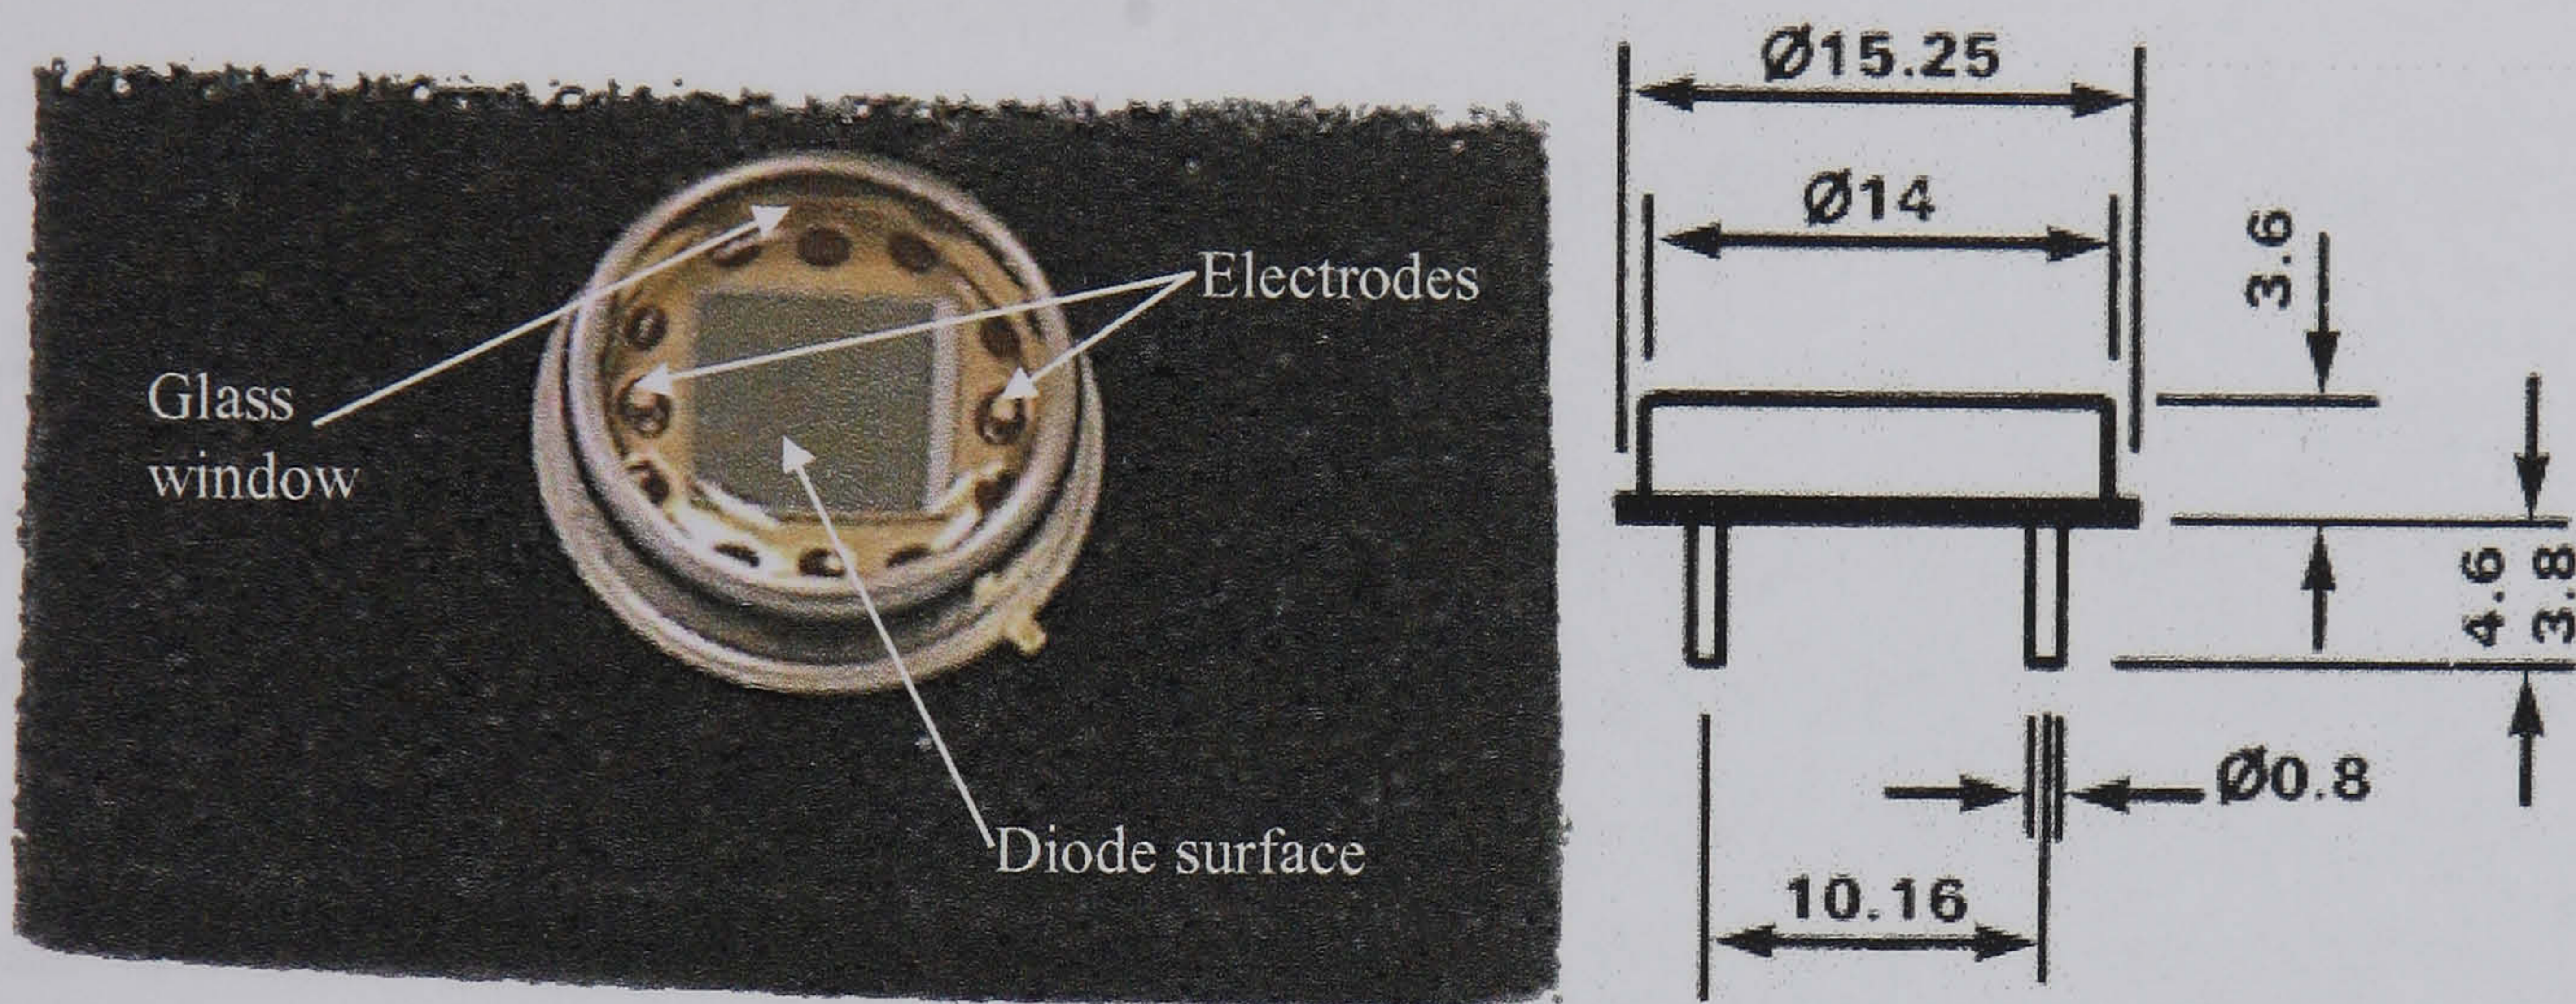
IPL Photodiode and packaging dimensions(in mm)
